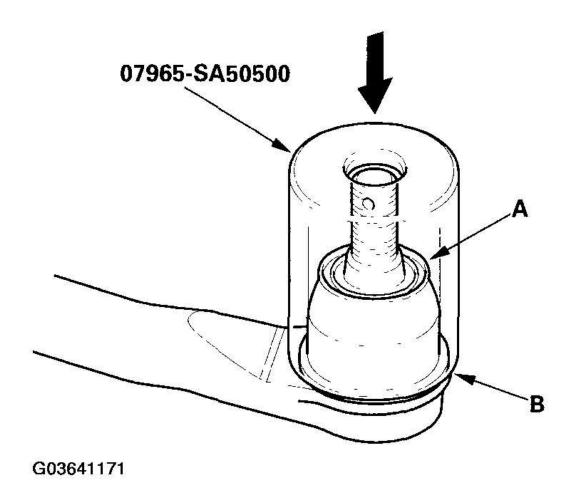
Installing New Boot Using Special Tool Courtesy of AMERICAN HONDA MOTOR CO., INC.
